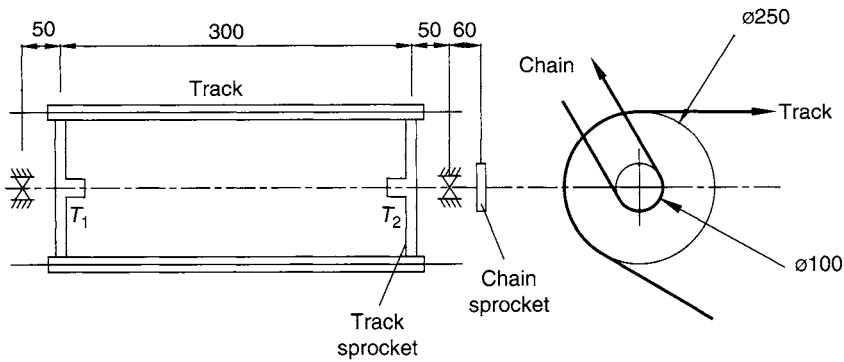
Schematic representation of the geometry and loading for a snow-track mobile drive shaft (dimensions in mm) (reproduced from Juvinal and Marshek, 1991).
